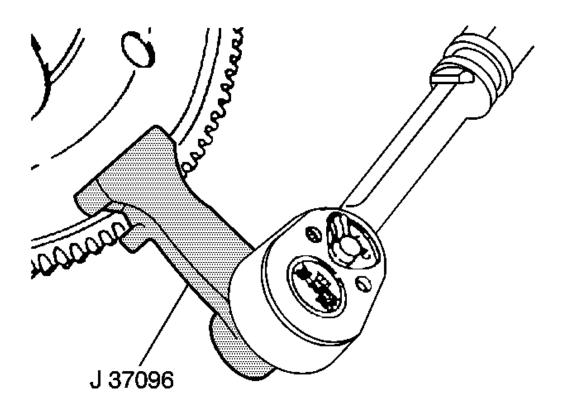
Holding Flywheel Courtesy of GENERAL MOTORS CORP.
